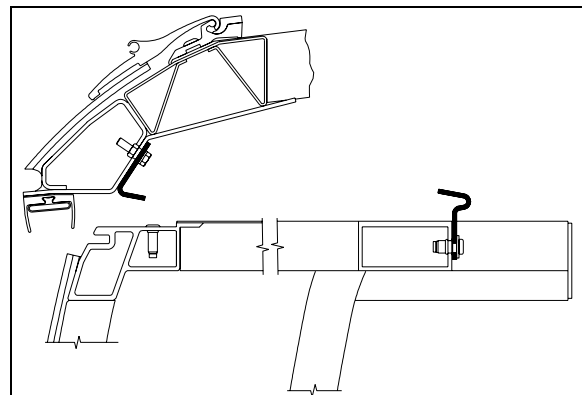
SLIDE-OUT 2" INSIDE – UPPER PART
